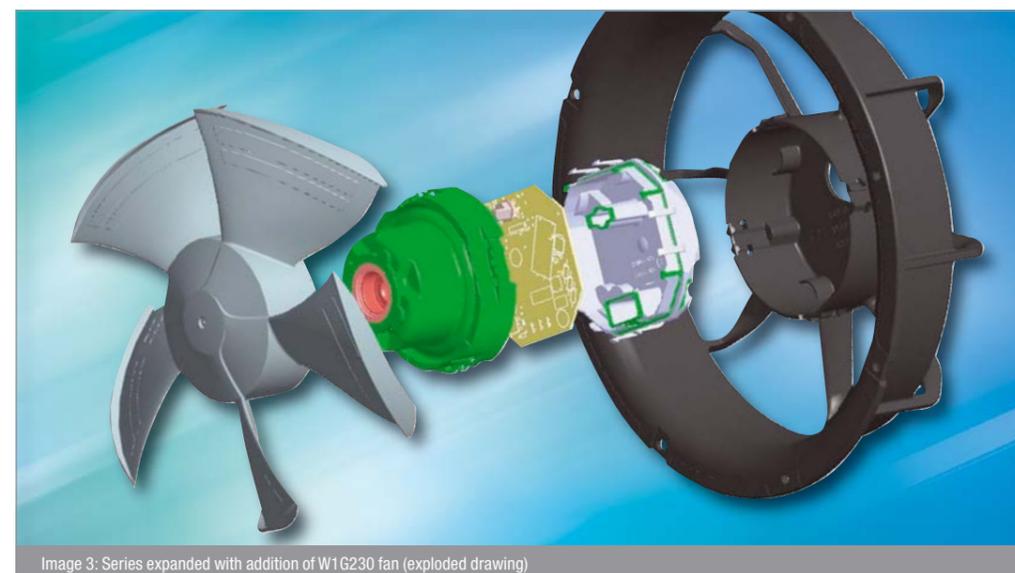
Series expanded with addition of W1G230 fan (exploded drawing)
